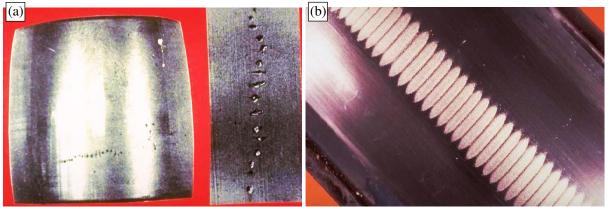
Bearing surfaces damaged by erosive wear (electrical erosion): (a) small craters (pits) on roller and inner ring due to the excessive voltage (electrical pitting) and (b) shallow and equally spaced groves (flutes) due to the current leakage (electrical fluting or washboarding).
